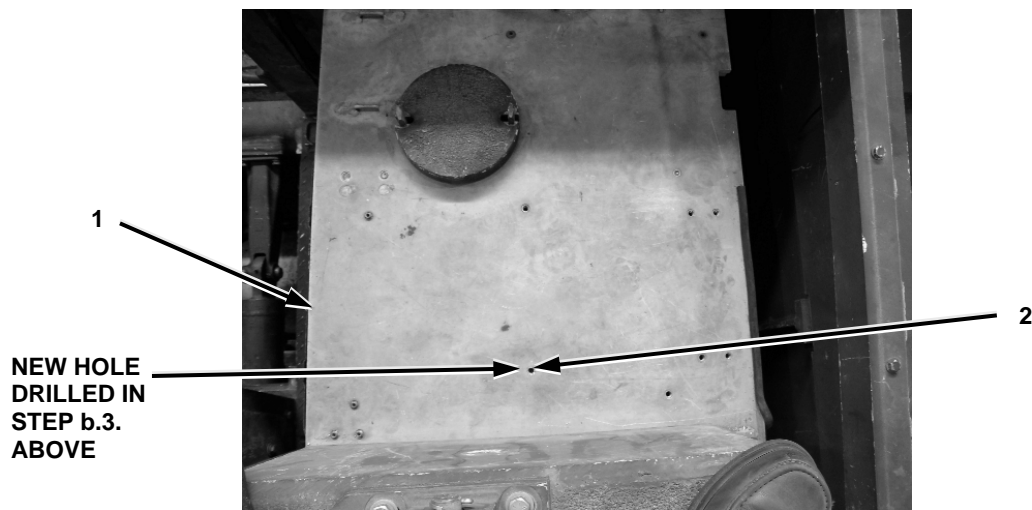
Locating and Drilling Fourth Hole for MCU Mounting Bracket Installation.
